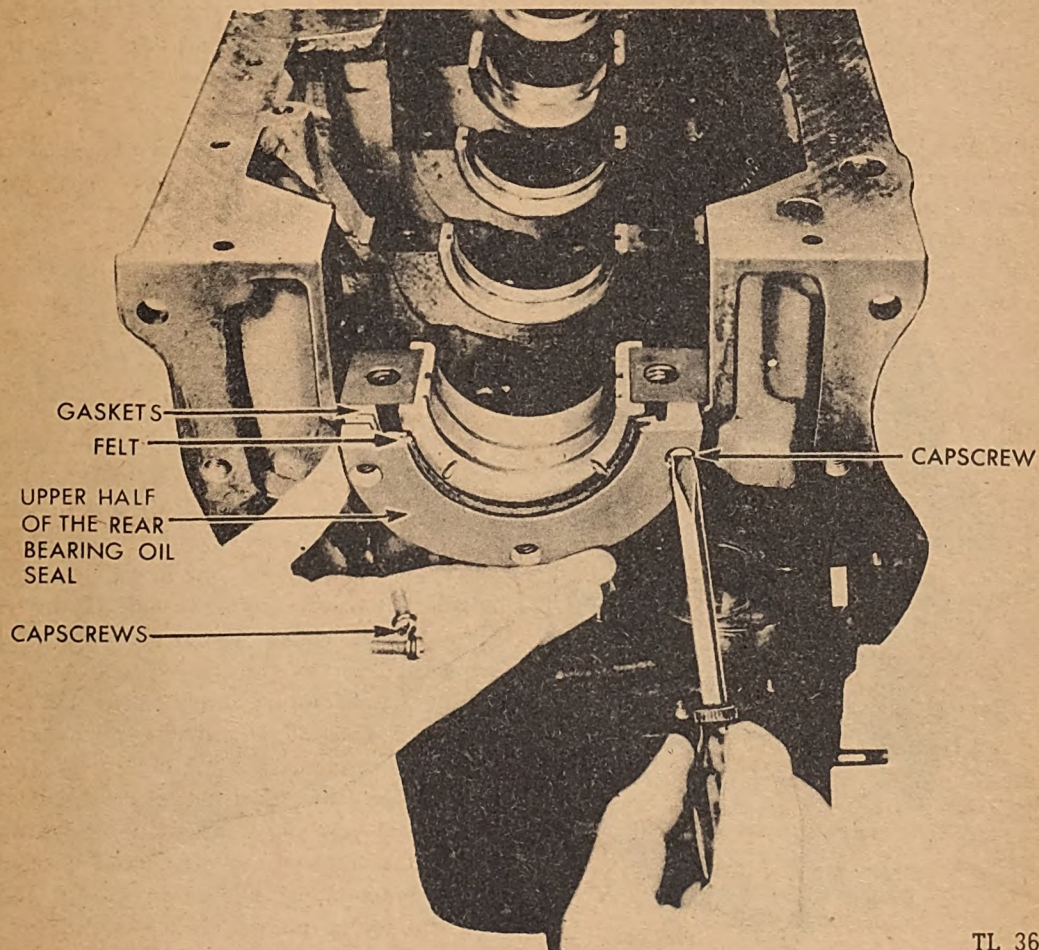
Installing Upper Half Rear Bearing Oil Seal
